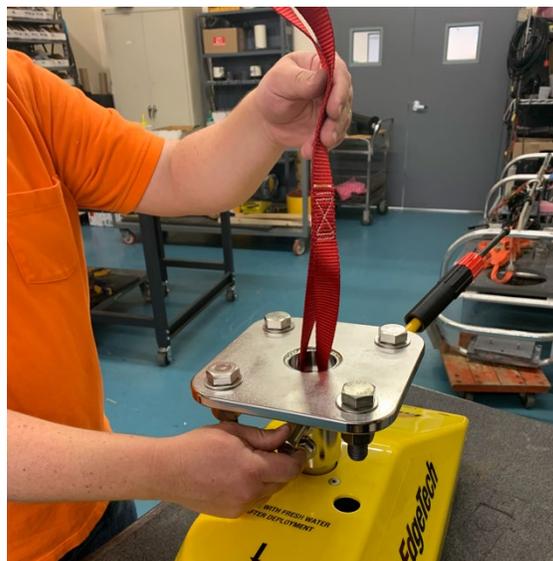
3400 Light and Ultra-Light Adaptor Flange Installation - Lifting Strap Installation
